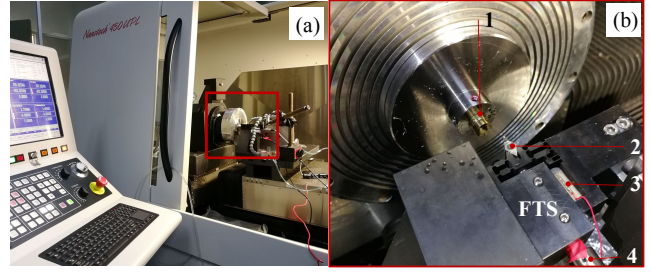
Experimental setup of the FTS, (a) the ultra-precision machine tool with the installed FTS, and (b) an enlarged view of the FTS, where 1: the workpiece installed on the spindle, 2: diamond tool, 3: piezoelectric actuator, 4: capacitive sensor probe.
